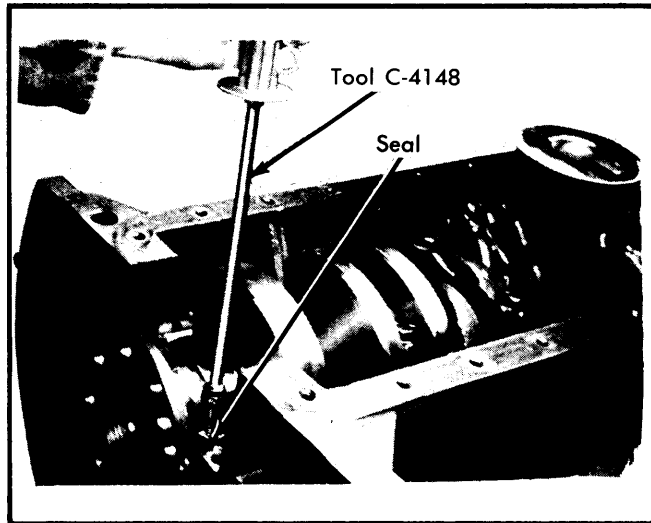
Using Tool C-4148 to Remove Upper Rear Main Oil Seal
